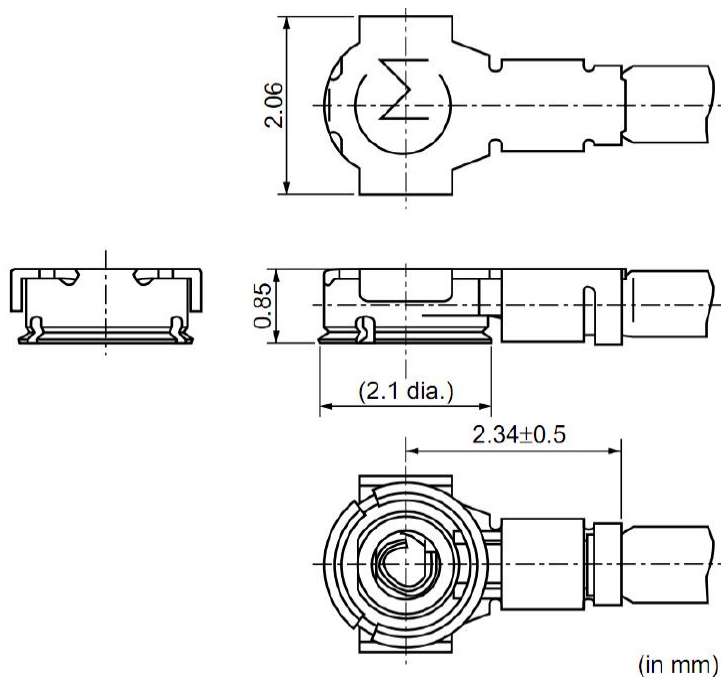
Dimensions of Mated Plugs (Ø 0.81 mm Coaxial Cables) (Unit: mm)
